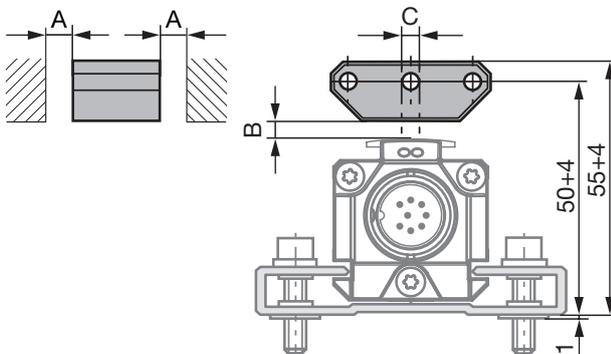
Dimensions and distances with BTL5-P-3800-2 magnet
